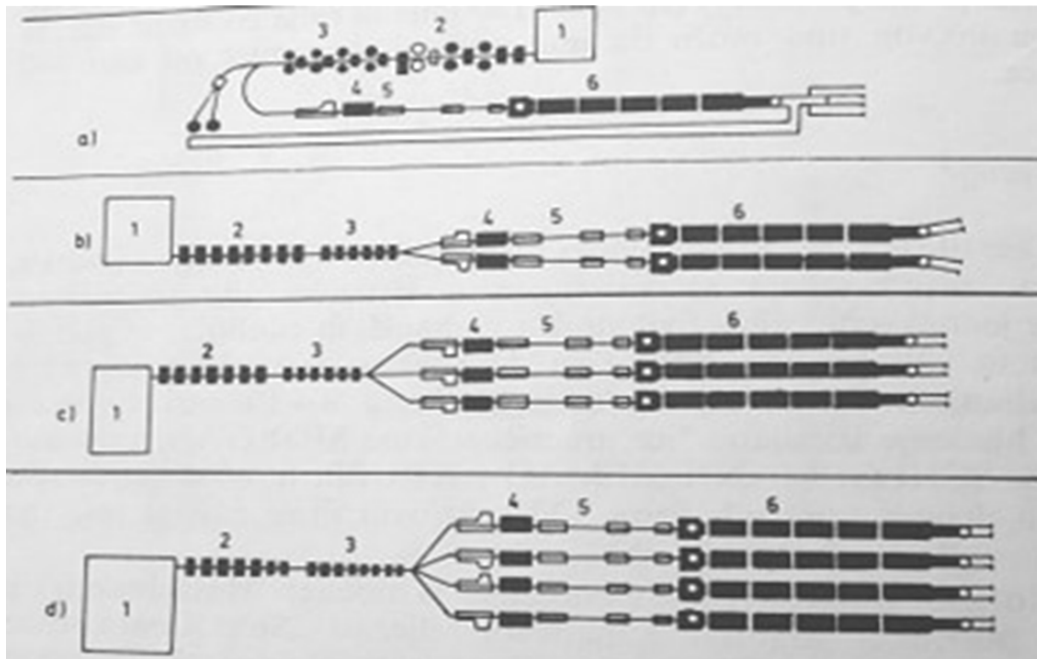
A layout of a modern generation - wire rod rolling mill [4]
